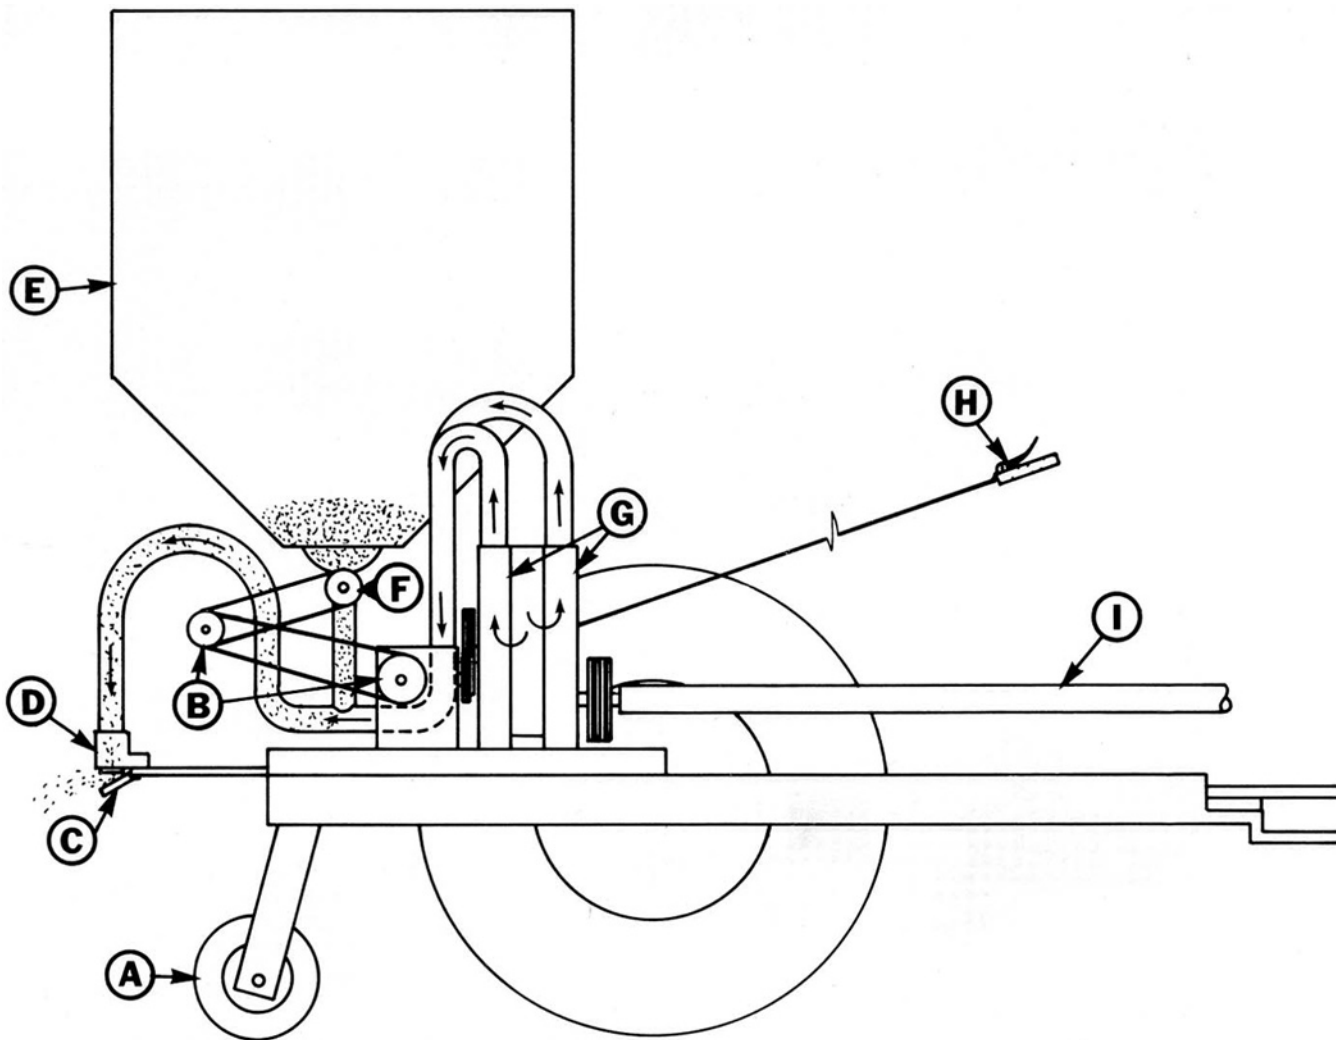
Schematic View of Horstine Granular Applicator: (A) Rear Wheel, (B) Interchangeable Meter Drive Sprockets, (C) Impact Plate, (D) Nozzle, (E) Hopper, (F) Meter, (G) Fans, (H) Meter Drive Clutch Control, (I) Power Shaft.
